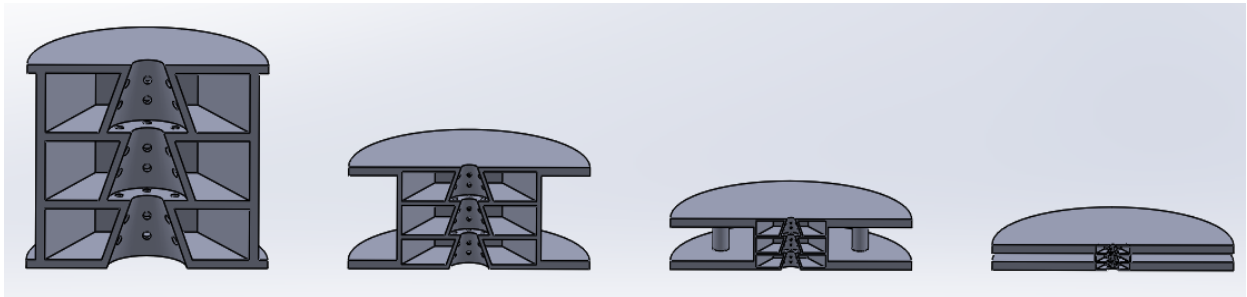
SISO - Downsizing Prototypes - Cross-Section Isometric CAD View
